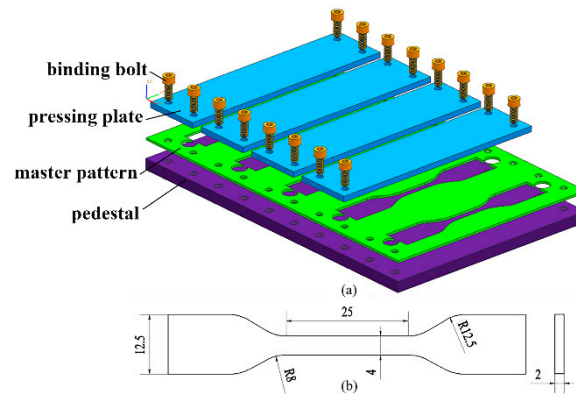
(a) Forming mold. (b) Dumbbell sample.
